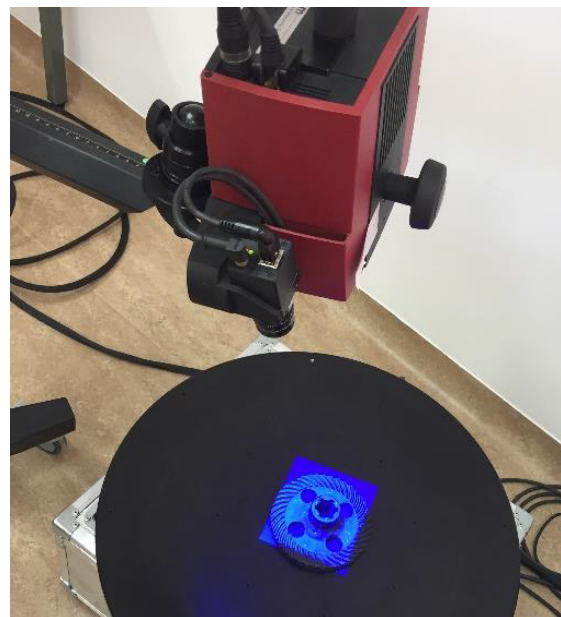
A view of the face gear measurement using an ATOS 3D scanner on a standard rotation table. 3D, three-dimensional.
